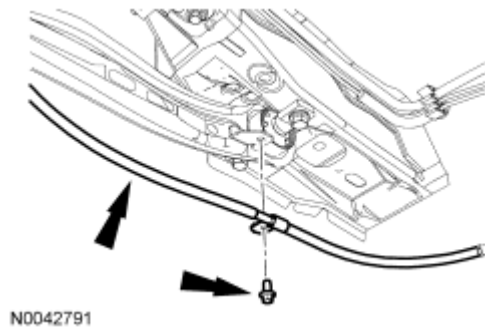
Locating Parking Brake Cable Bracket Bolt
